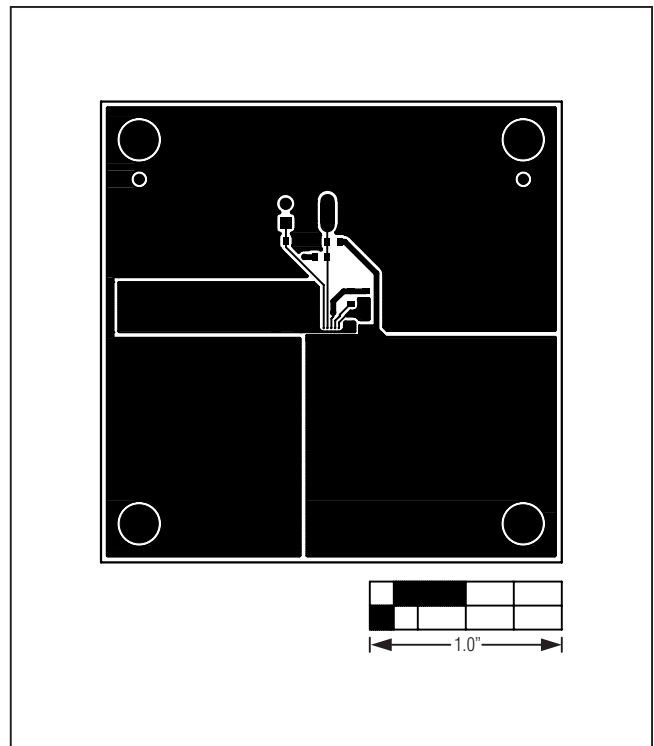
MAX15101/MAX15102/MAX15103 EV Kits PCB Layout—Component Side
